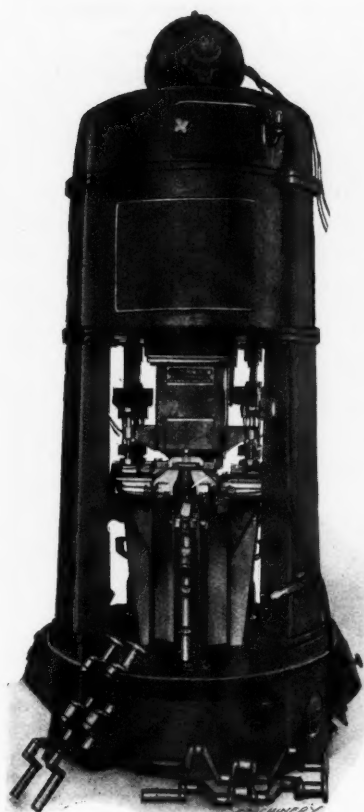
Baush Station Type Machine for drilling and reaming six holes in crankshaft flange
